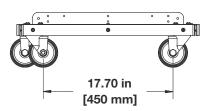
MCF-750 Caster Frame (for cabinets without rigging) Dimensions
